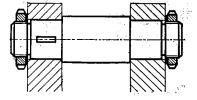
Pivot pin fixed against axial and angular displacements between detachable supports and used to hold supports together
